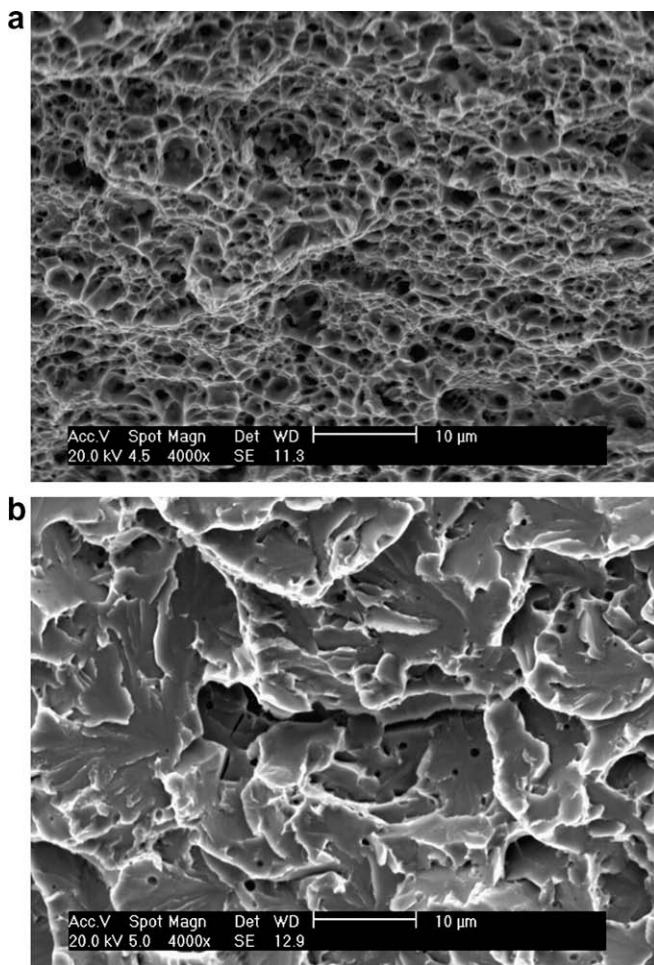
(a) Fracture surface of A point indicated in the Fig 9 and (b) fracture surface of B point indicated in the Fig 9.
